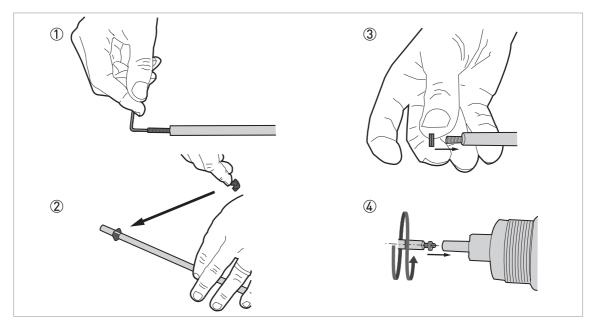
How to assemble the segmented coaxial probe: part 1
